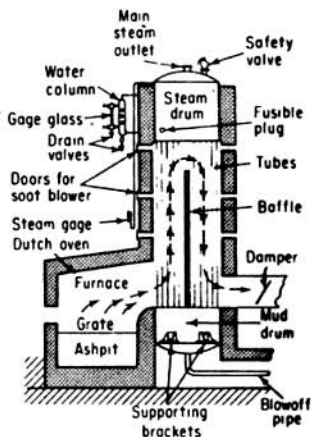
Vertical straight-tube type water-tube boiler.
